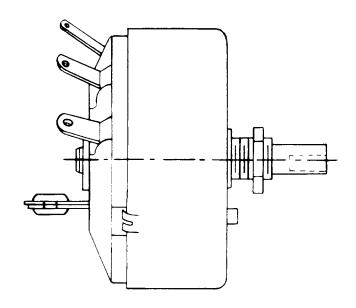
KS-15564 and KS-15718 Switches—Similar to Open-Type KS-5614
